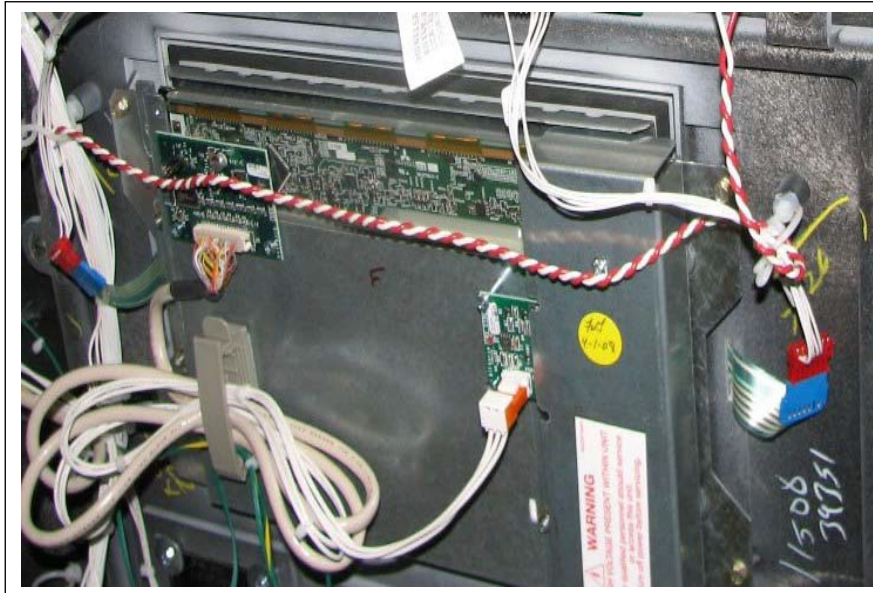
Disconnecting CPU Assembly to AC Distribution Cable
